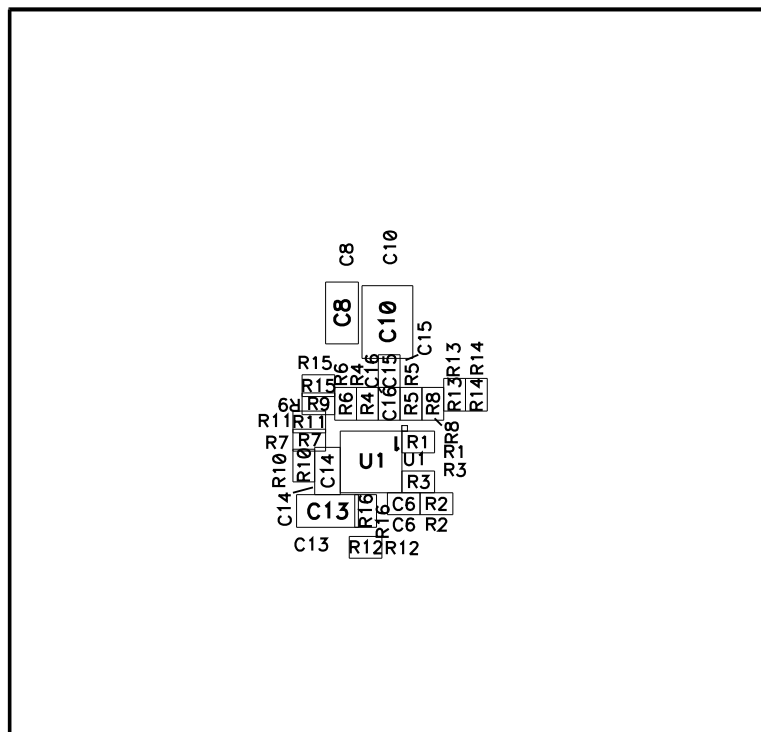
Bottom Layer Assembly Drawing (bottom view)
